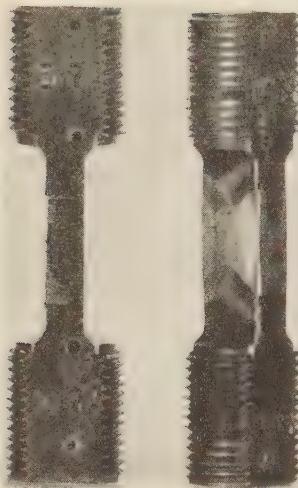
LOW-TEMPERATURE TENSILE IMPACT-TEST SPECIMEN FOR BUTT-WELDS
